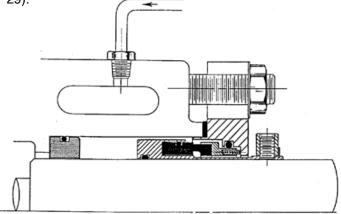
Jacketed Seal Chamber with Restriction Bushing
